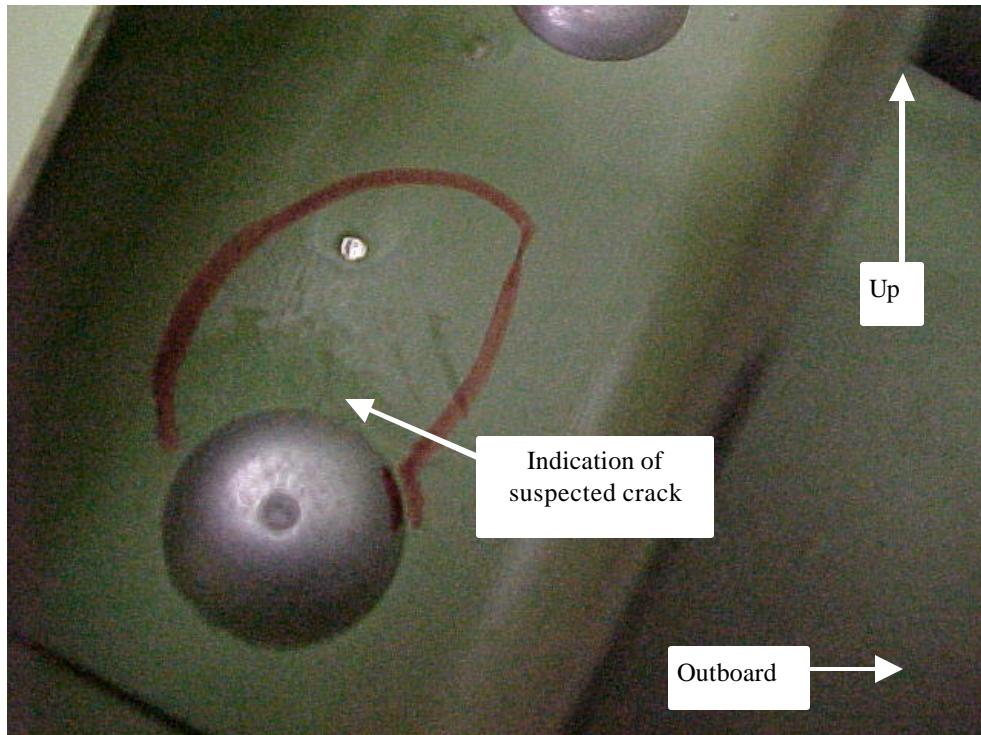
Photograph of stringer clip at FS 660, stringer 4R. Detailed visual inspection discovered an indication.
